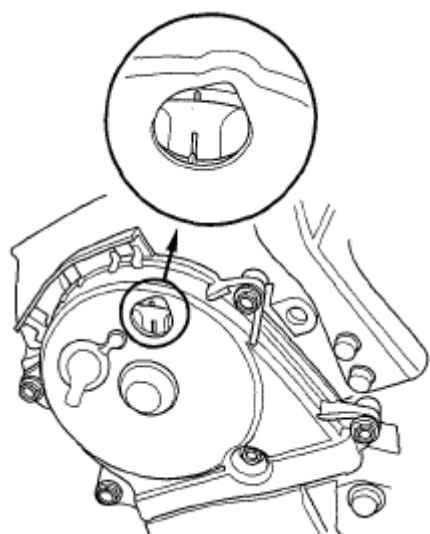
Identifying Camshaft Pulley Marks - Rear
